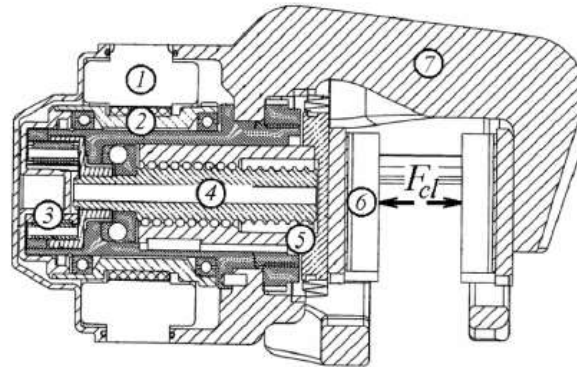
Electromechanical brake caliper with built-in linear actuated motor [16]
